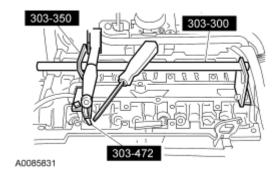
Identifying Special Tools (303-300, 303-350, 303-472) Courtesy of FORD MOTOR CO.
